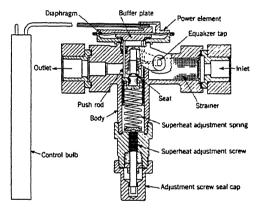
TYPICAL THERMOSTATIC EXPANSION VALVE
